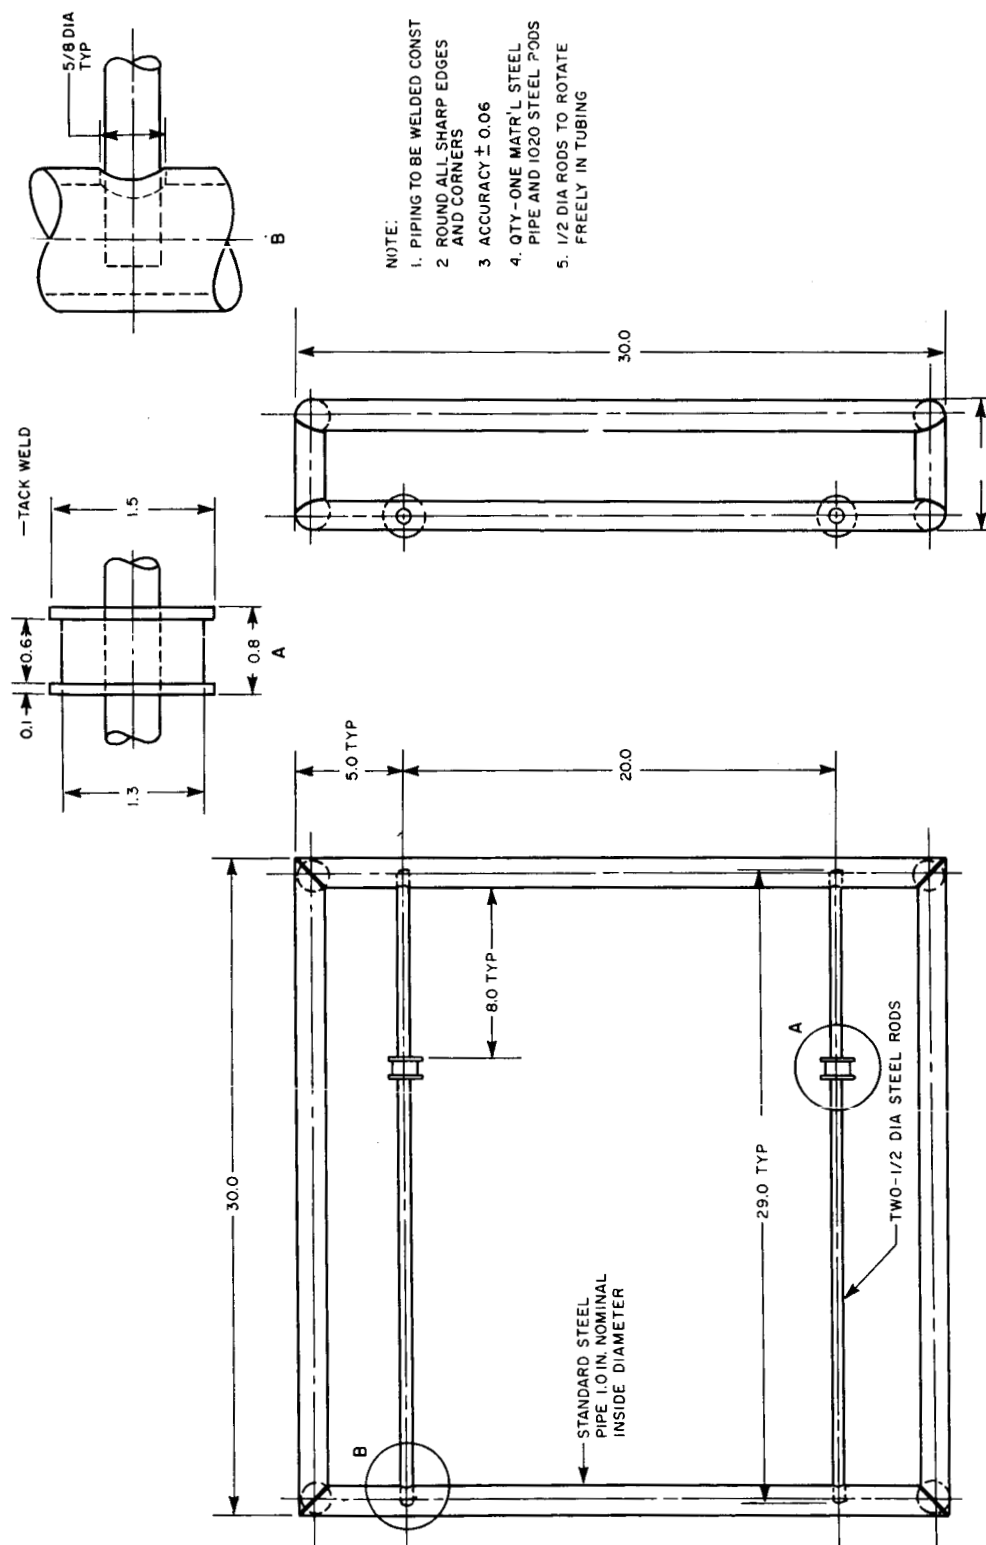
STERILIZATION CONTAINER HANDLING FIXTURE
